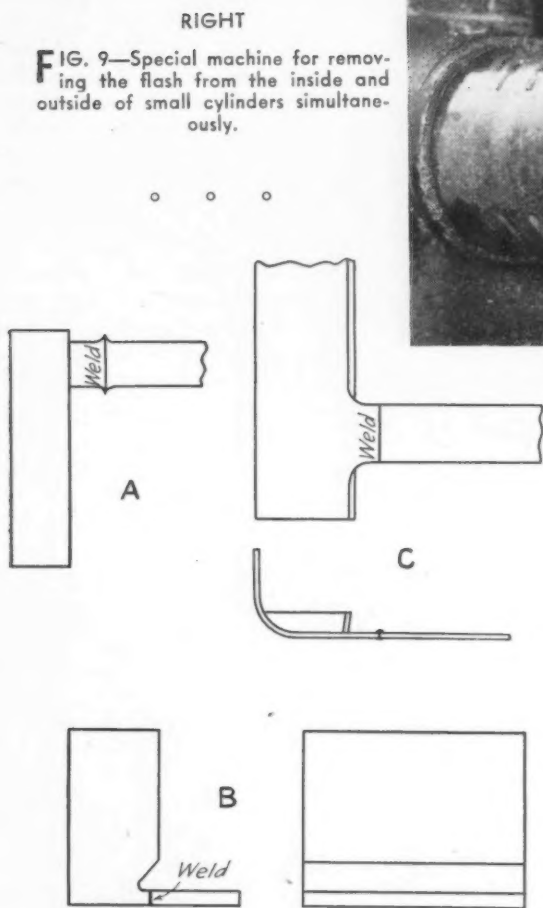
When welding materials of different thicknesses, it is essential to design the weld area to give proper heat balance between the two parts.
